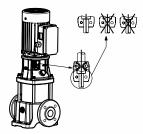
Coupling adjustment SCR(N) 32, 45, 64, 90, 120, and 150
